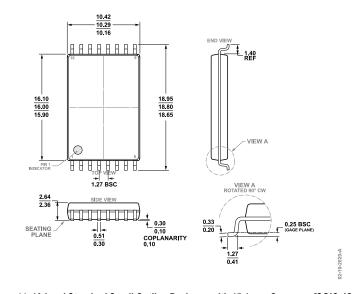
16-Lead Standard Small Outline Package, with 15.1 mm Creepage [SOIC_IC]
